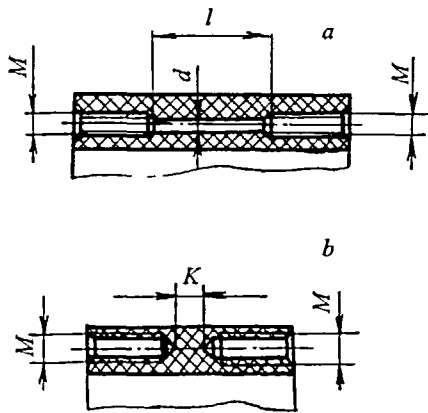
Part of a ceramic case for a fuse with through (a) and blind (b) thread holes.
